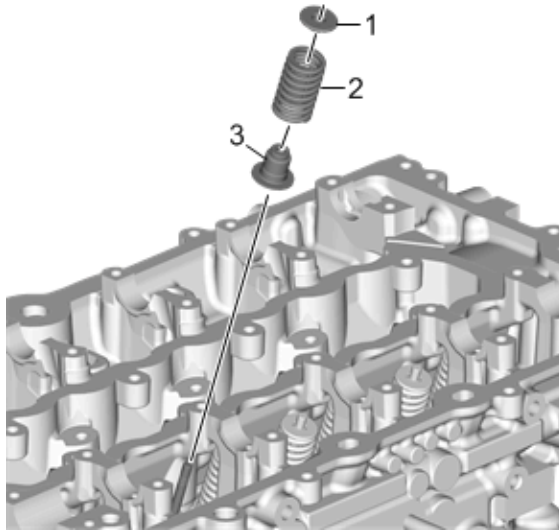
Valve Spring Retainer, Valve Spring And Oil Seal
